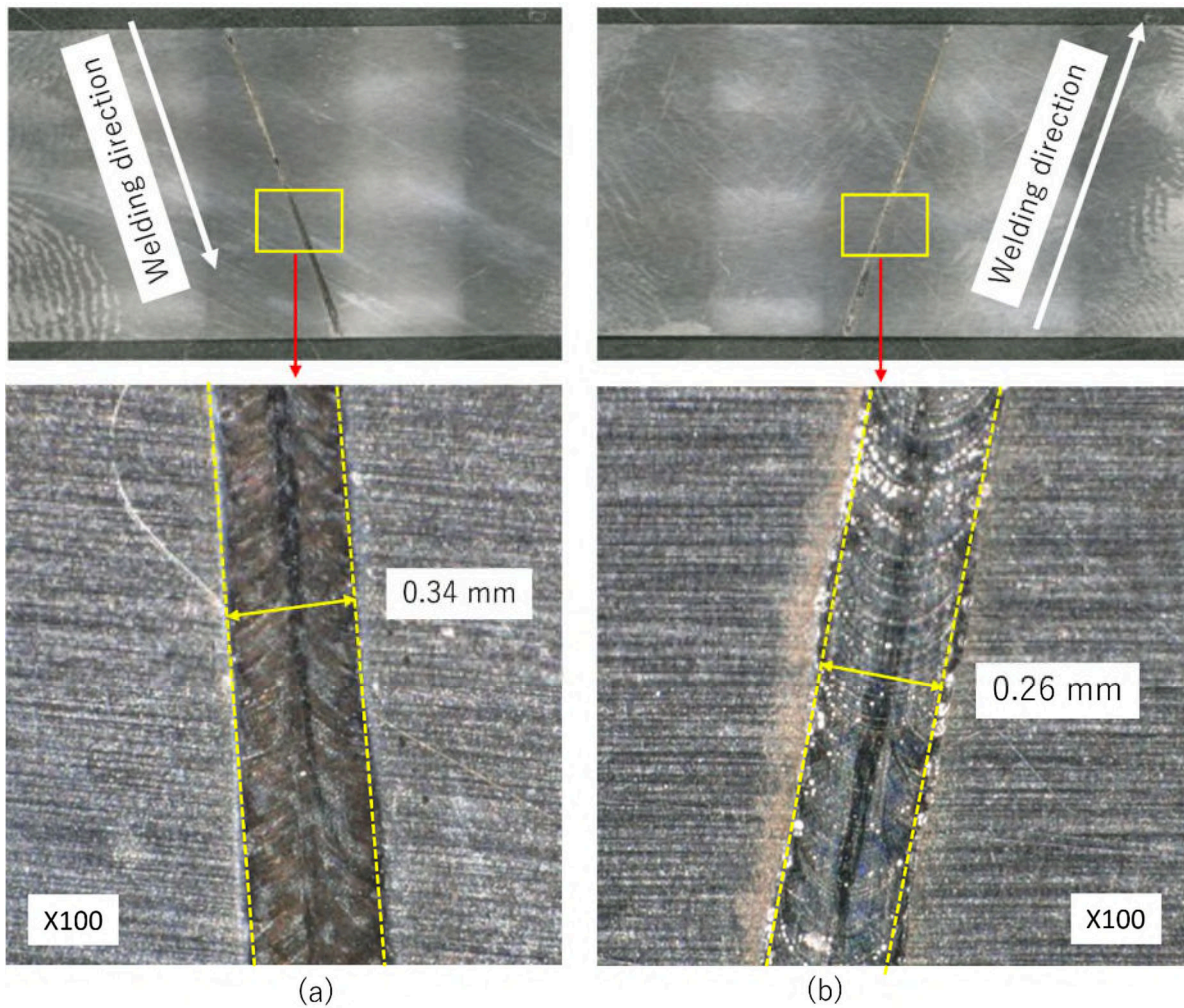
Bead profile of 0.03-mm-thickness SUS stainless steel: (a) top surface and (b) bottom surface.
